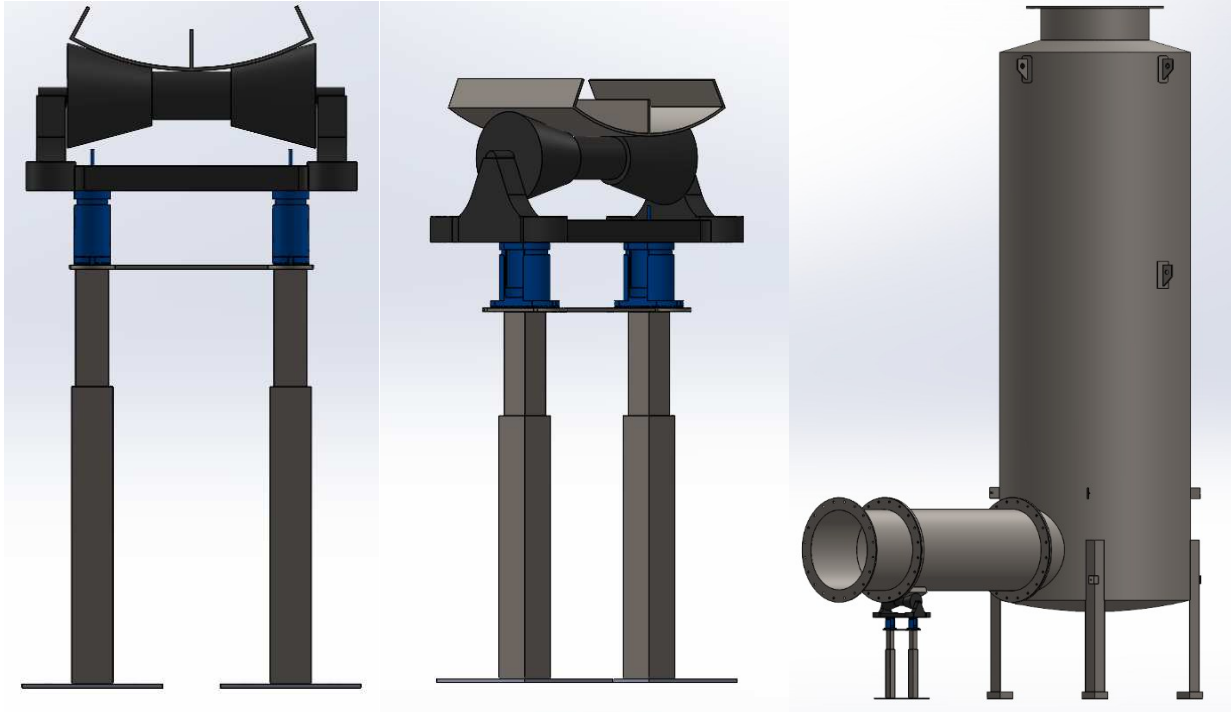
Exhaust Pipe Extension stand SolidWorks CAD model.
